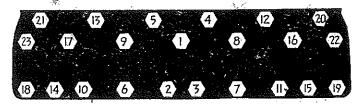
Head tightening chart for 361, 426, 451 and 477 engines
